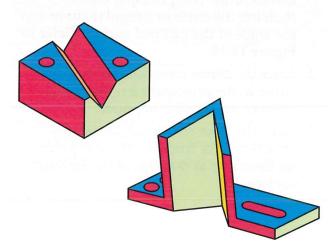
Some manufactured parts require that angles between different planes be defined before the parts can actually be manufactured. Auxiliary views are used to define these angles.
